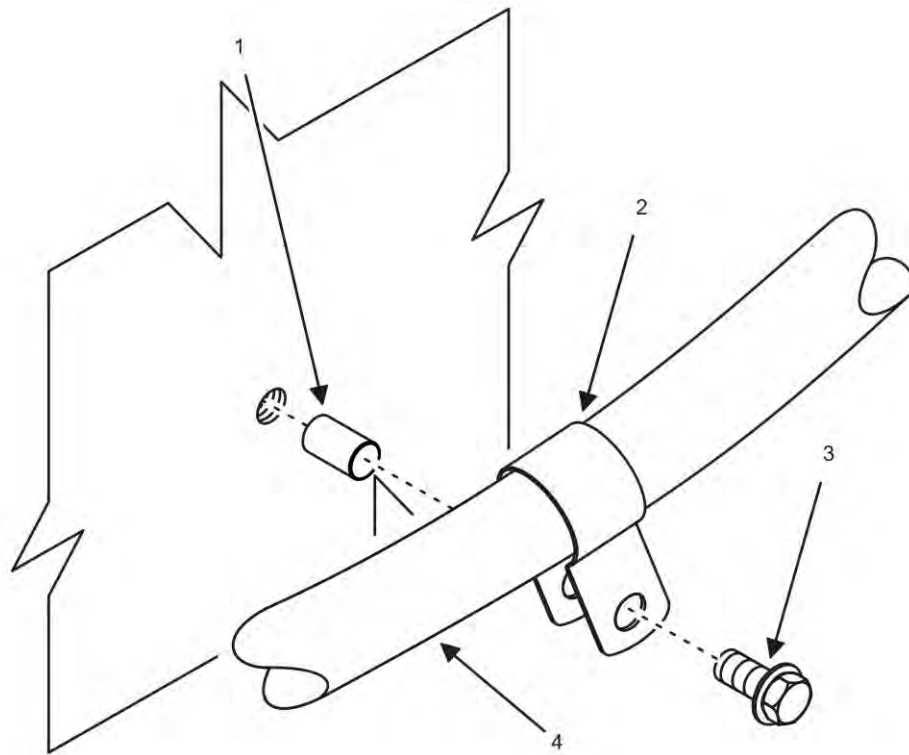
ECM Wiring Harness — Remove Front of Engine.
